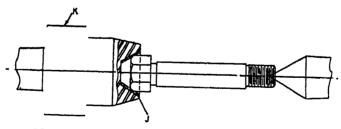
HOW A HEXAGON-HEAD BOLT IS LOCATED
